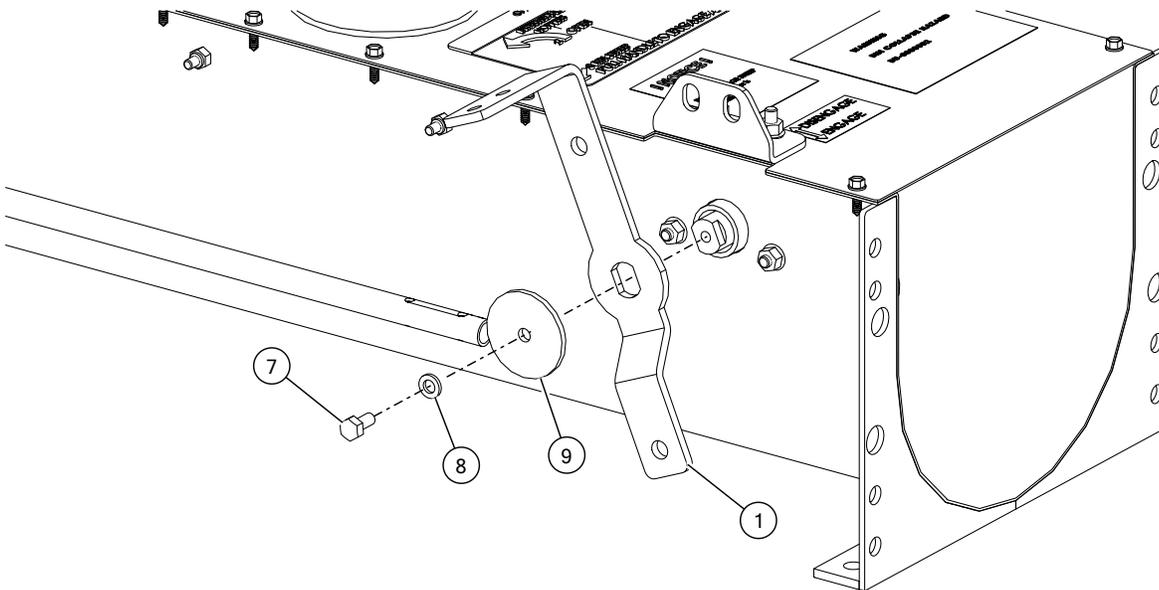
Unfasten the Coupler from the Gearbox Control Rod
